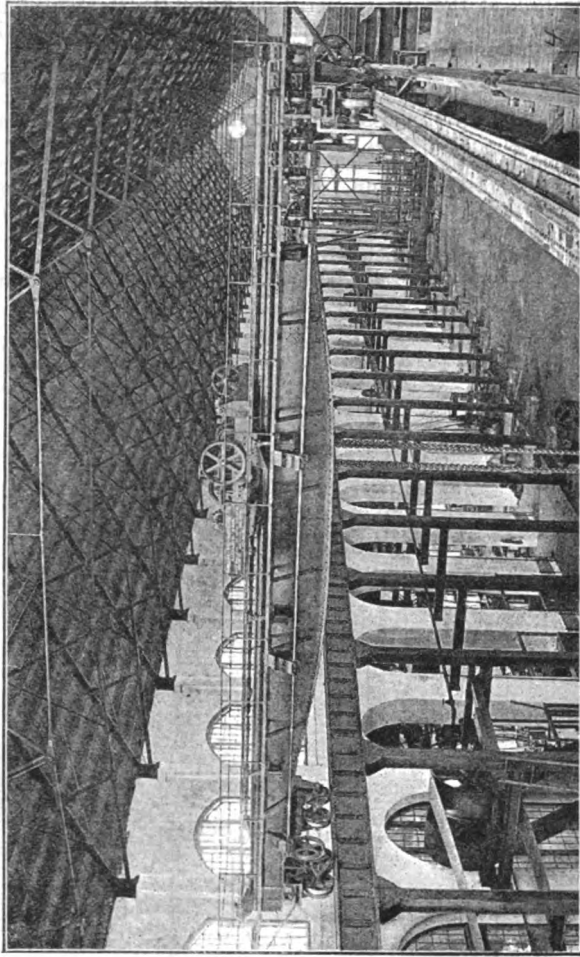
TRAVELLING CRANE IN NEW GUN-SHOP.
